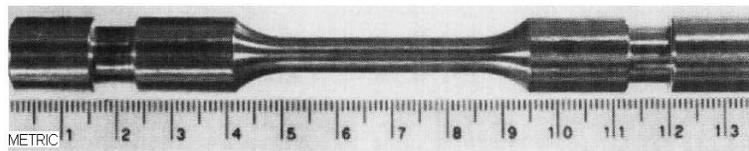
Standard 6 mm diameter cylindrical tensile specimen
